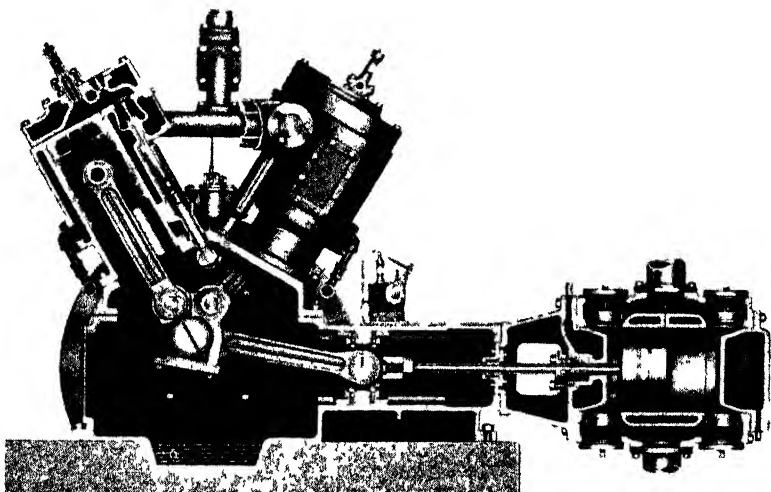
Ingersoll-Rand V-type multicylinder gas engine.
